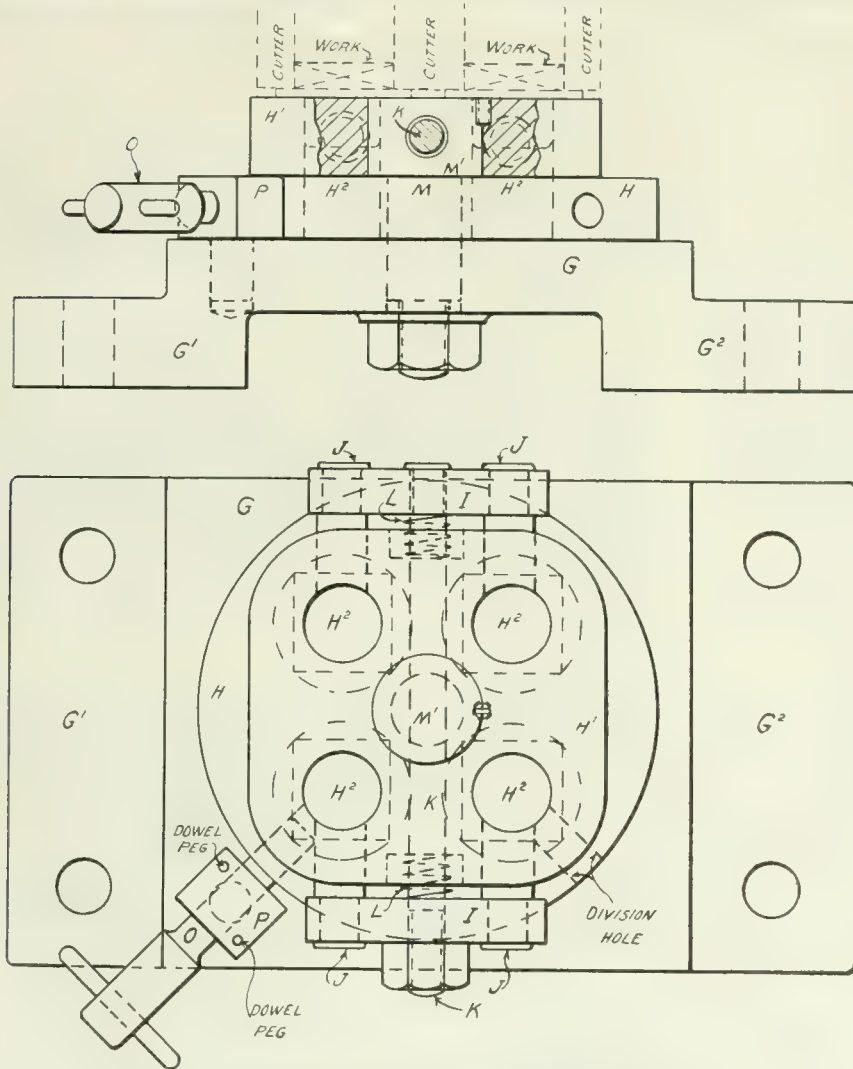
SPANNER FLATS MILLING FIXTURE.
